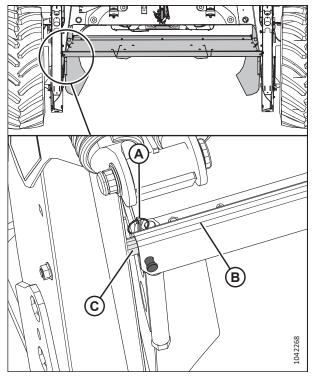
Forming Shield Secured to Front of Windrower Legs
